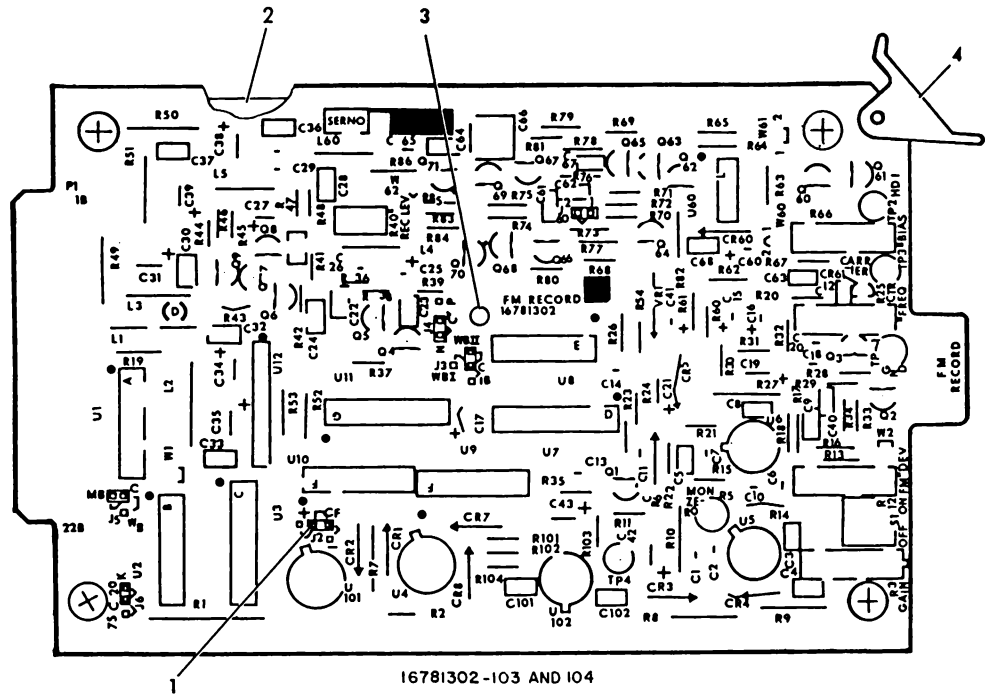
FM RECORD CIRCUIT CARD ASSEMBLY
